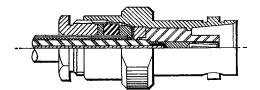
A—Assembly instructions—BNC Type plugs and sockets—General
